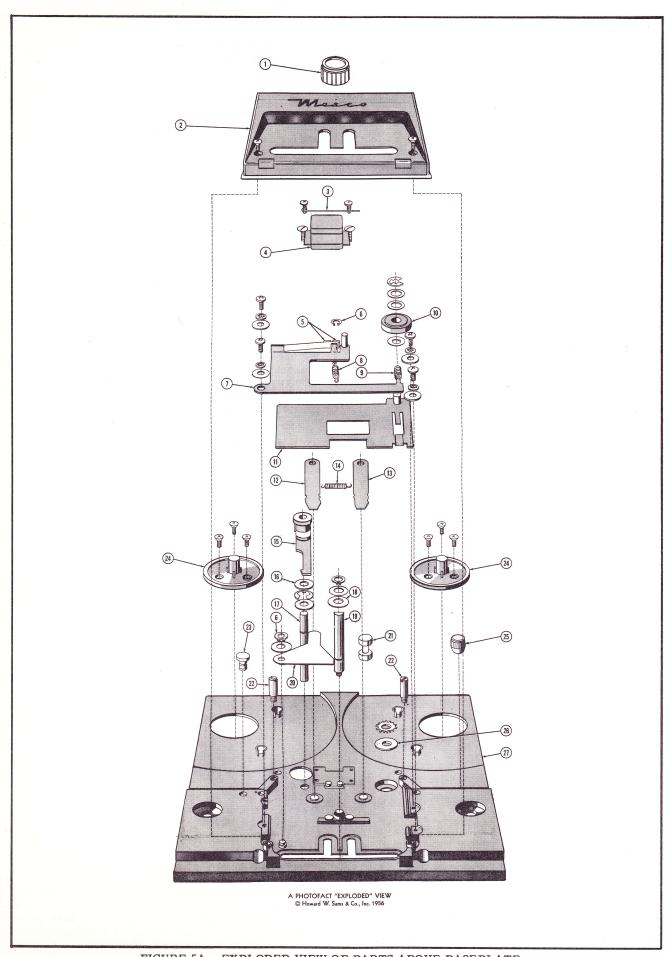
A. EXPLODED VIEW OF PARTS ABOVE BASEPLATE.
